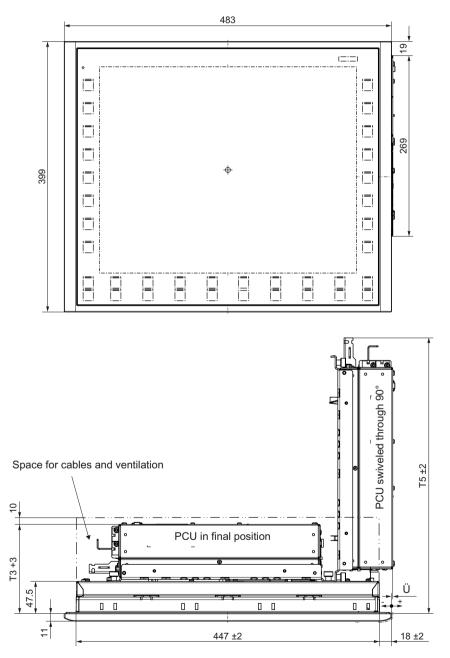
Dimension sheet for attaching the PCU to the OP 019 operator panel front
